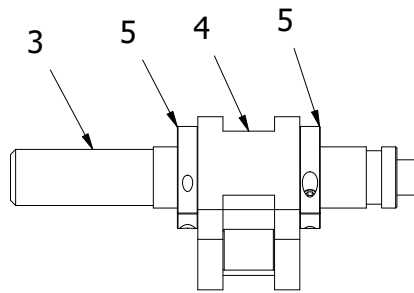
AM-1928-F10 Aft Mount Spindle Assembly, RH
